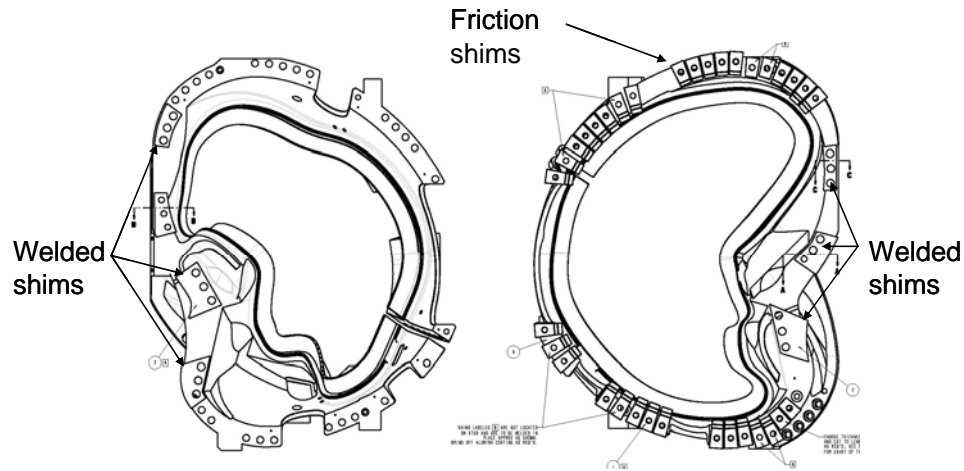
Intra-period interface details (A-A, A-B, and B-C): Note that the welded shims are interleaved to equalize the weld shrinkage stress on both sides of the inner leg to minimize bending.
